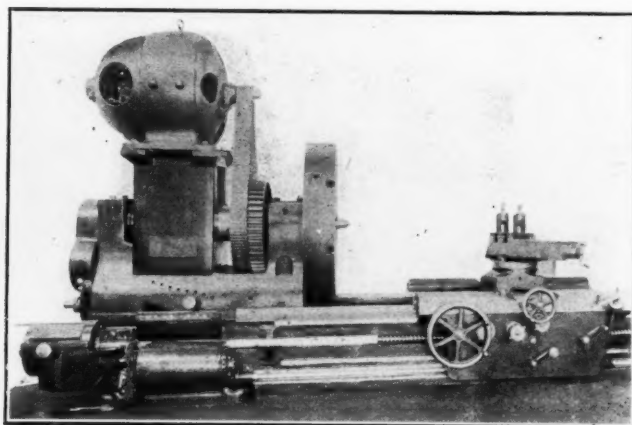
SILENT CHAIN HEADSTOCK DRIVE UPON A LODGE AND SHIPLEY LATHE.—CROCKER-WHEELER VARIABLE-SPEED MOTOR.
